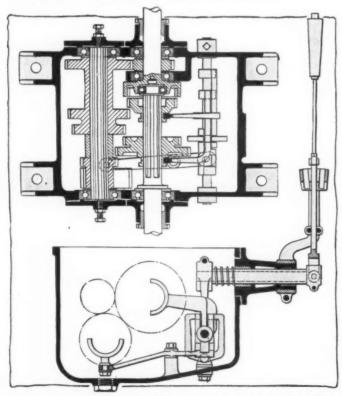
An ingenious gearshift is the product of E. J. Wrigley & Co. This will be exhibited at Olympia and comprises a guide bar of circular section fitted inside the gearbox and carrying slides, each of which can be actuated independently of the other
